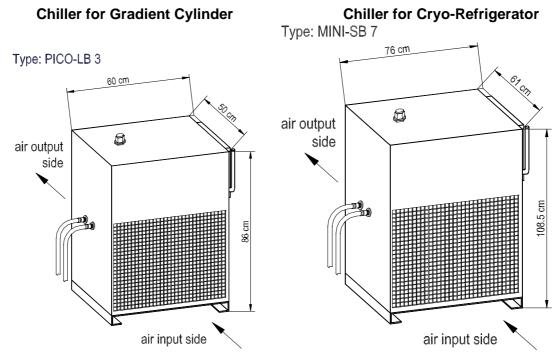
c: View of the Cooling Water Units (Recirculating Chiller Systems)
